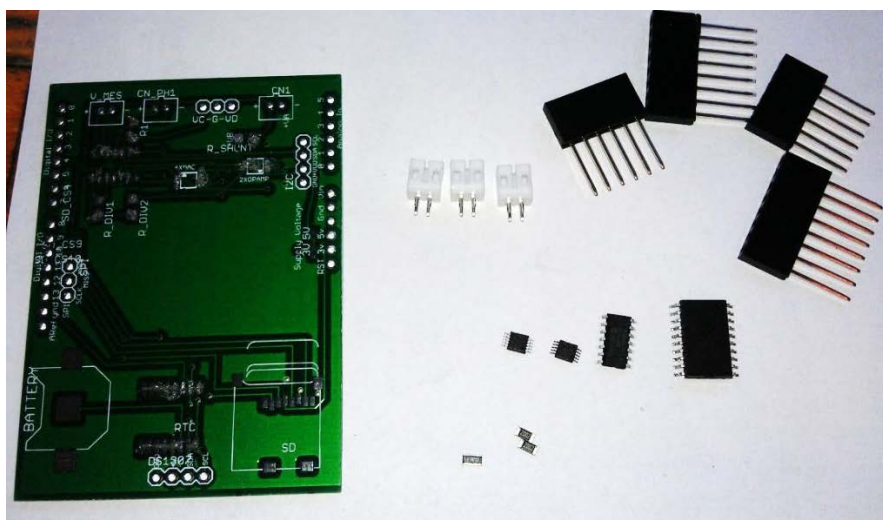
The finalized board design with the 2-layer PCB (left), test connectors (white, middle), board headers (top right) and the microchips and resistors (lower middle).
